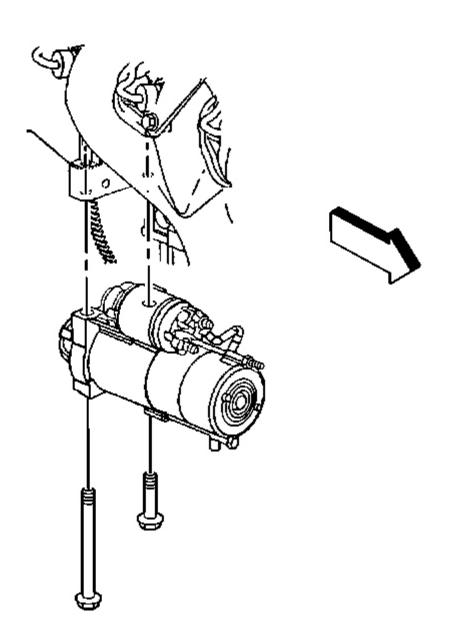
View Of Starter Motor Bolts Courtesy of GENERAL MOTORS CORP.
